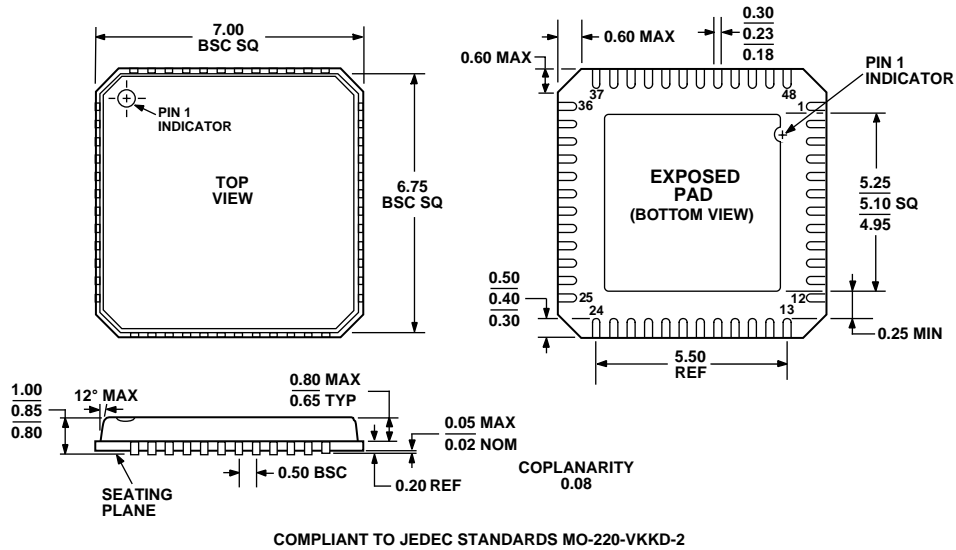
48-Lead Lead Frame Chip Scale Package [LFCSP]
